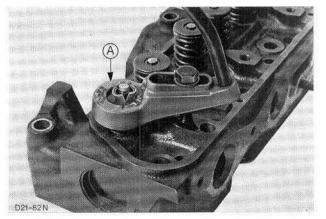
Removal of valve springs. A – Special Tool G2-6513-A.
